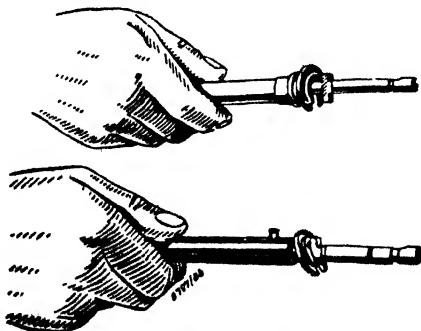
Showing the special Plunger Gripping Device, holding the Pump Plunger and Spring Plate placed in position.
